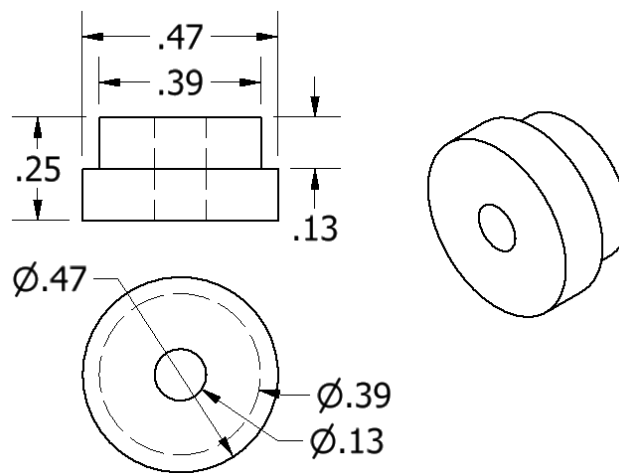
End cap for Mark 2 grabber. Dimensions in inches.
